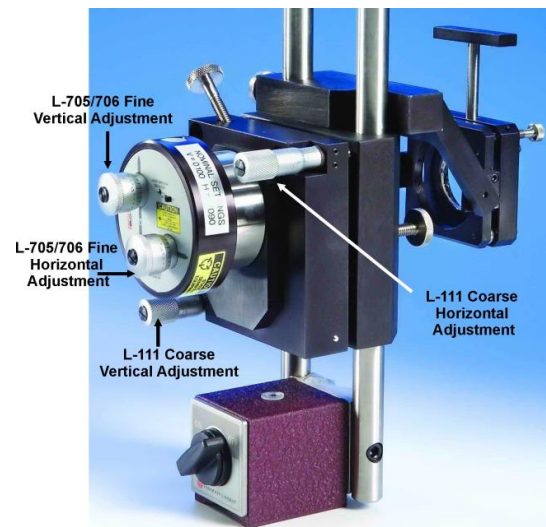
L-706 Laser and L-102 Beam Translator on L-111 Laser Stand
